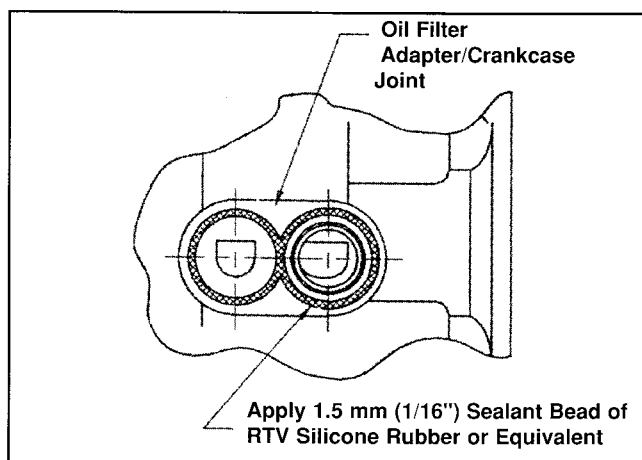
Sealant Pattern Oil Filter Adapter/Crankcase Joint.
